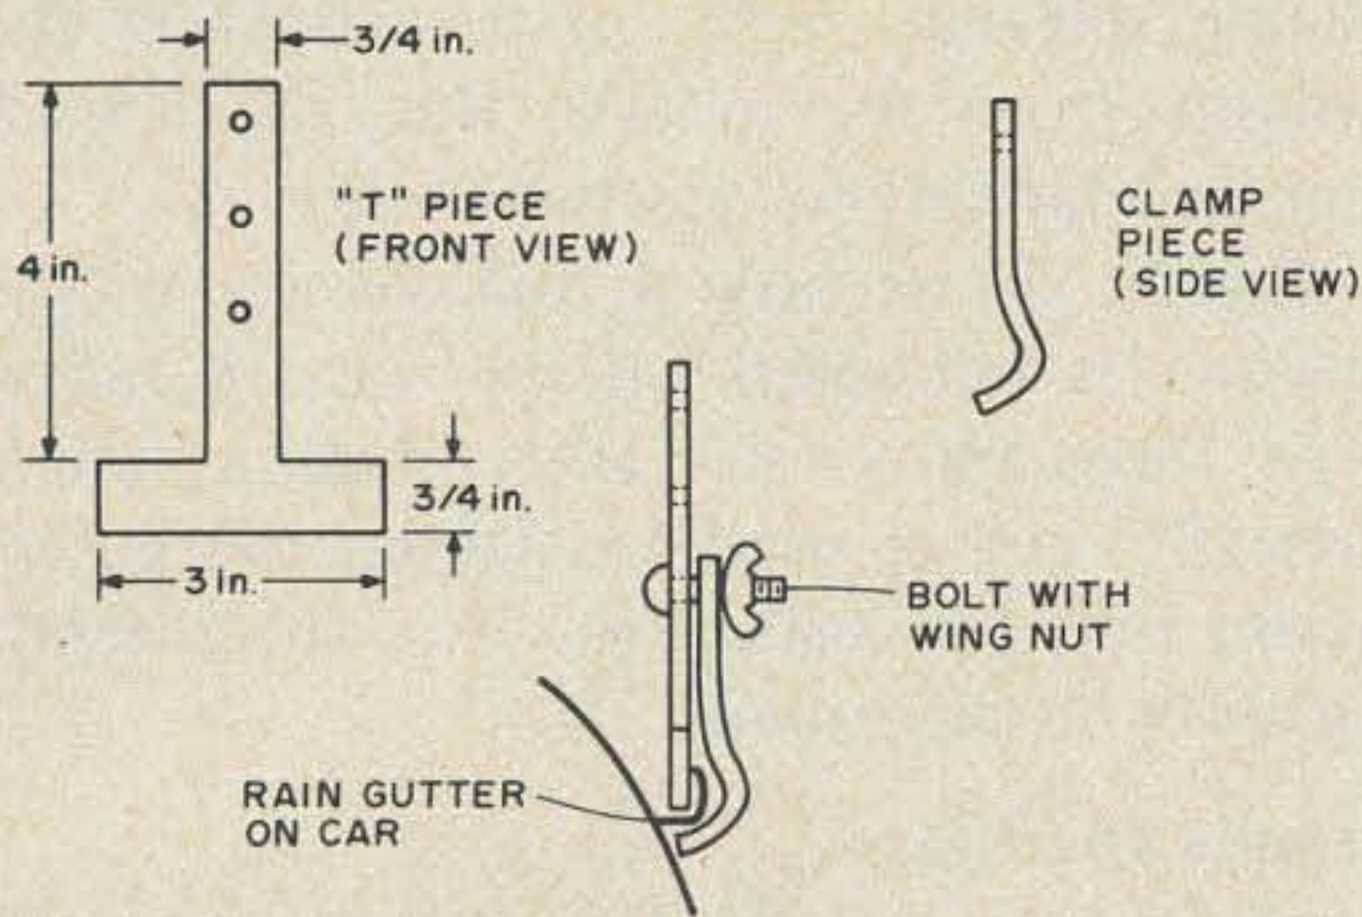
Rain gutter mount showing "T" piece, clamp piece and assembly of two pieces together on rain gutter. All holes are  $\frac{1}{4}$ ".
